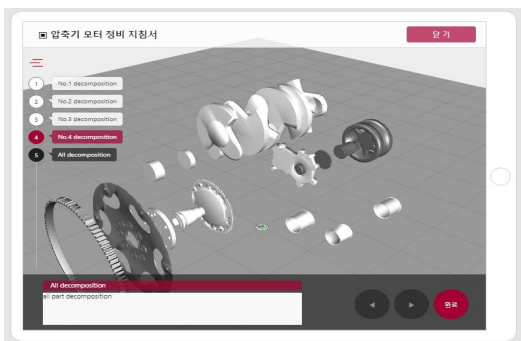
Crankshaft Disassembly Screen(Vuforia Studio)
